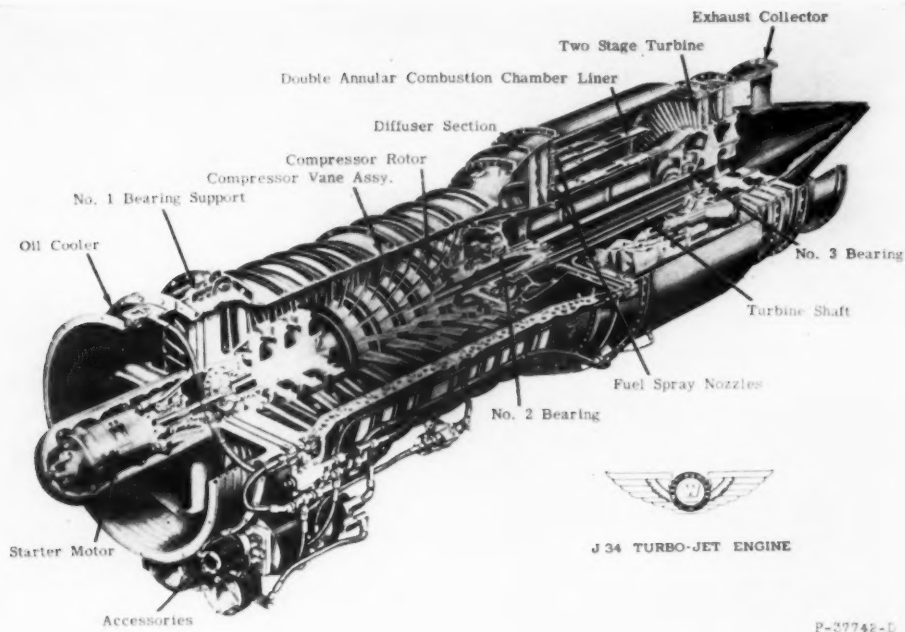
Cut-away view of the Westinghouse J-34 turbo-jet engine, with identification of components.
